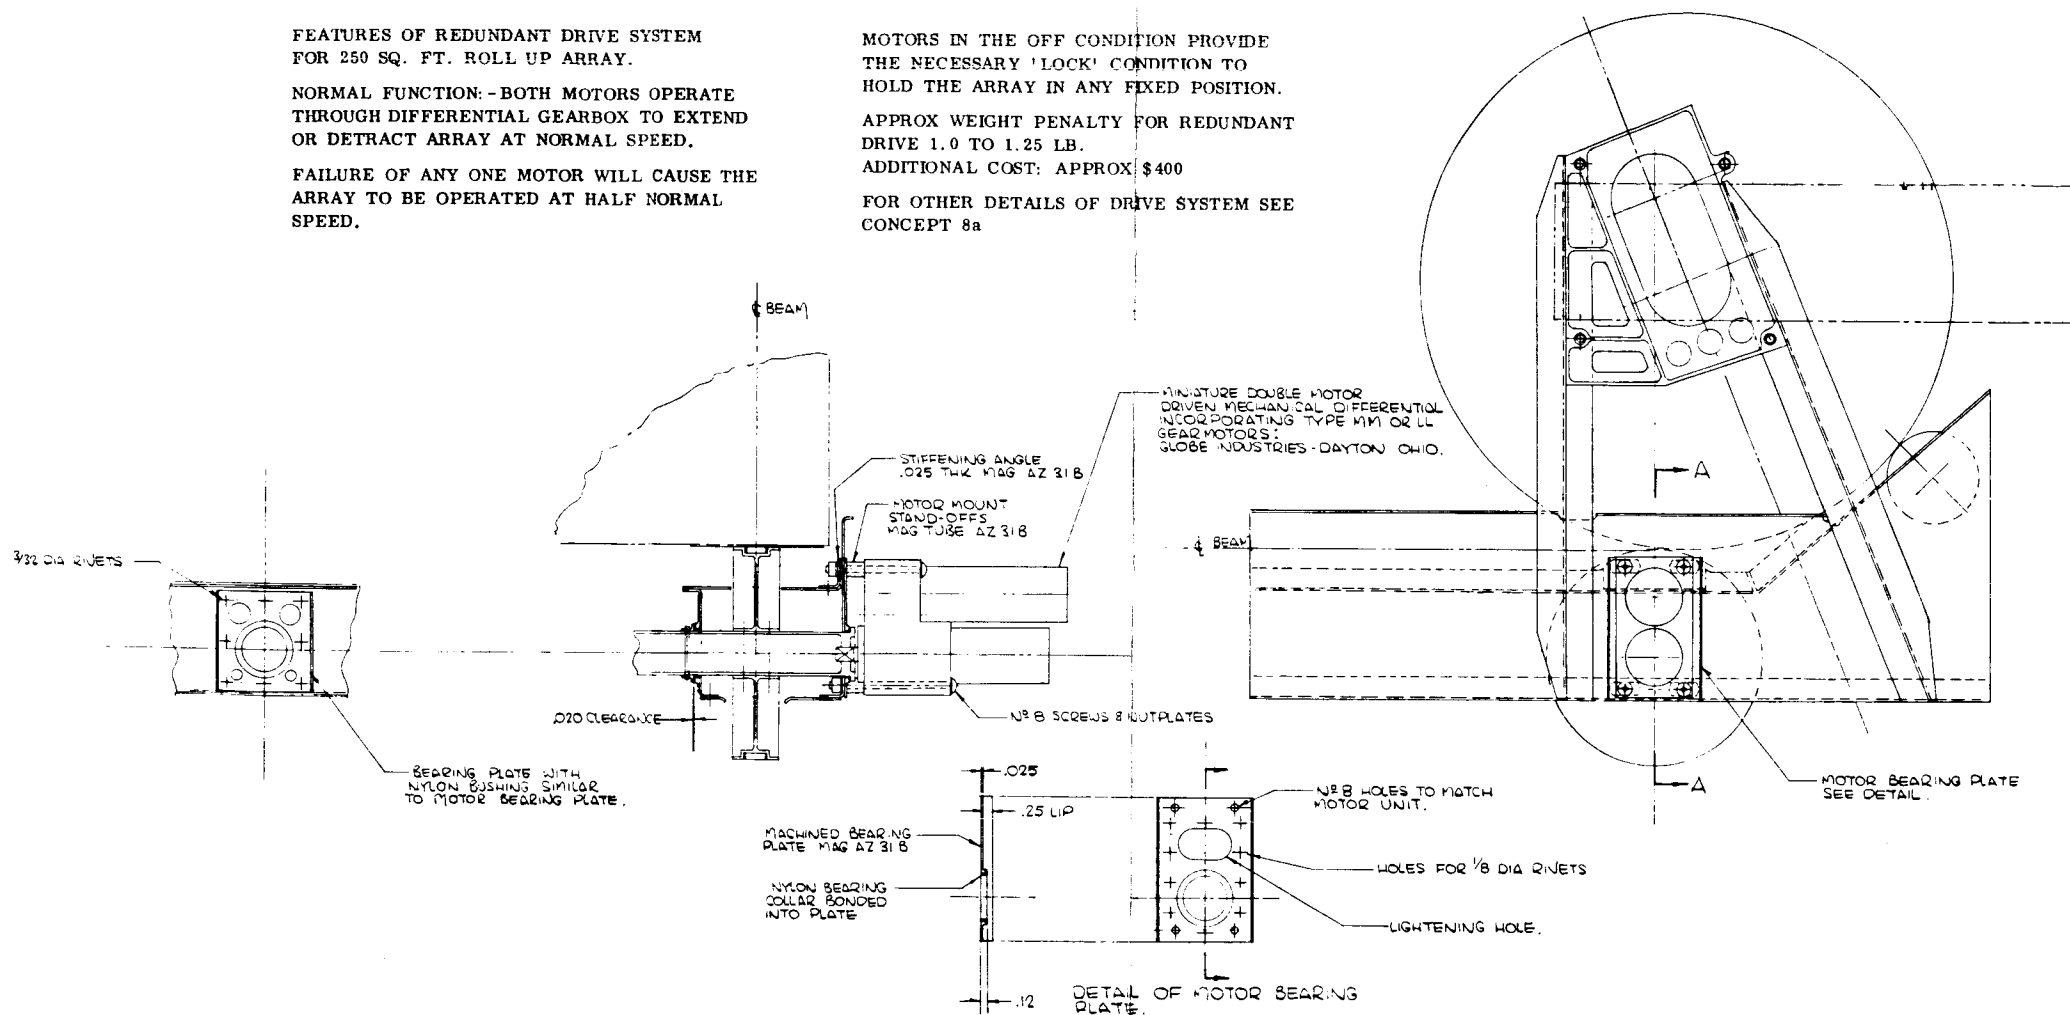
Model 400 - Motor Drive, Double Gear Motor, Concept 8b.
